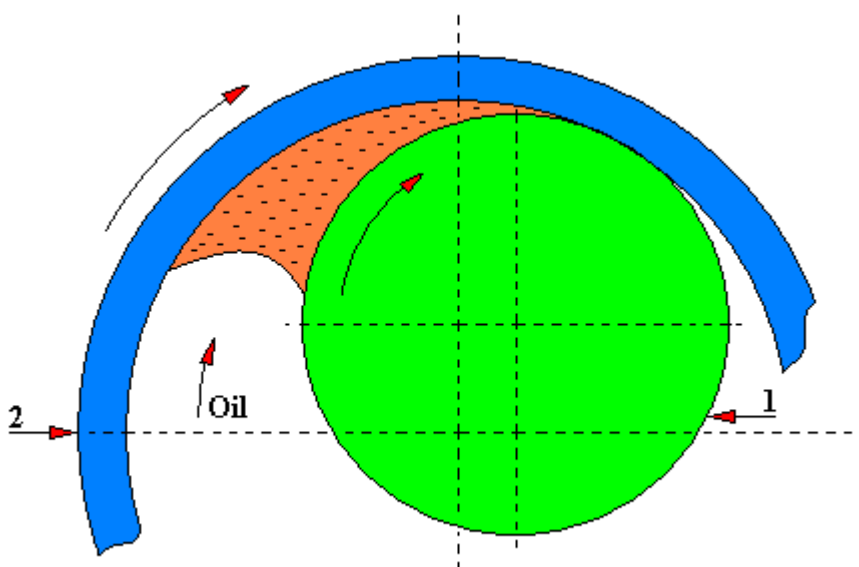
A diagram of a design solution of a radial bearing lubricated with a fixed ring [180]
